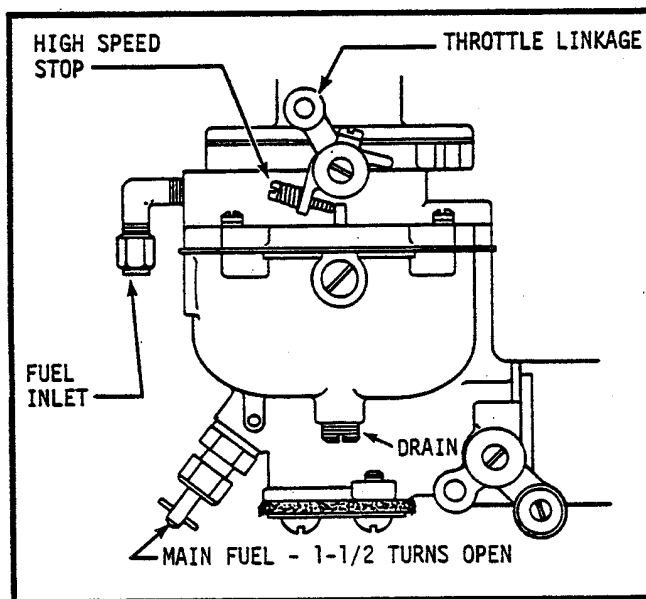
TYPICAL UPDRAFT CARBURETOR
